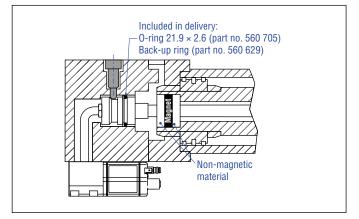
Mounting example of pressure fit flange  ${}^{\rm w}S{}^{\rm w}$  and sensor electronics with bottom cable entry
